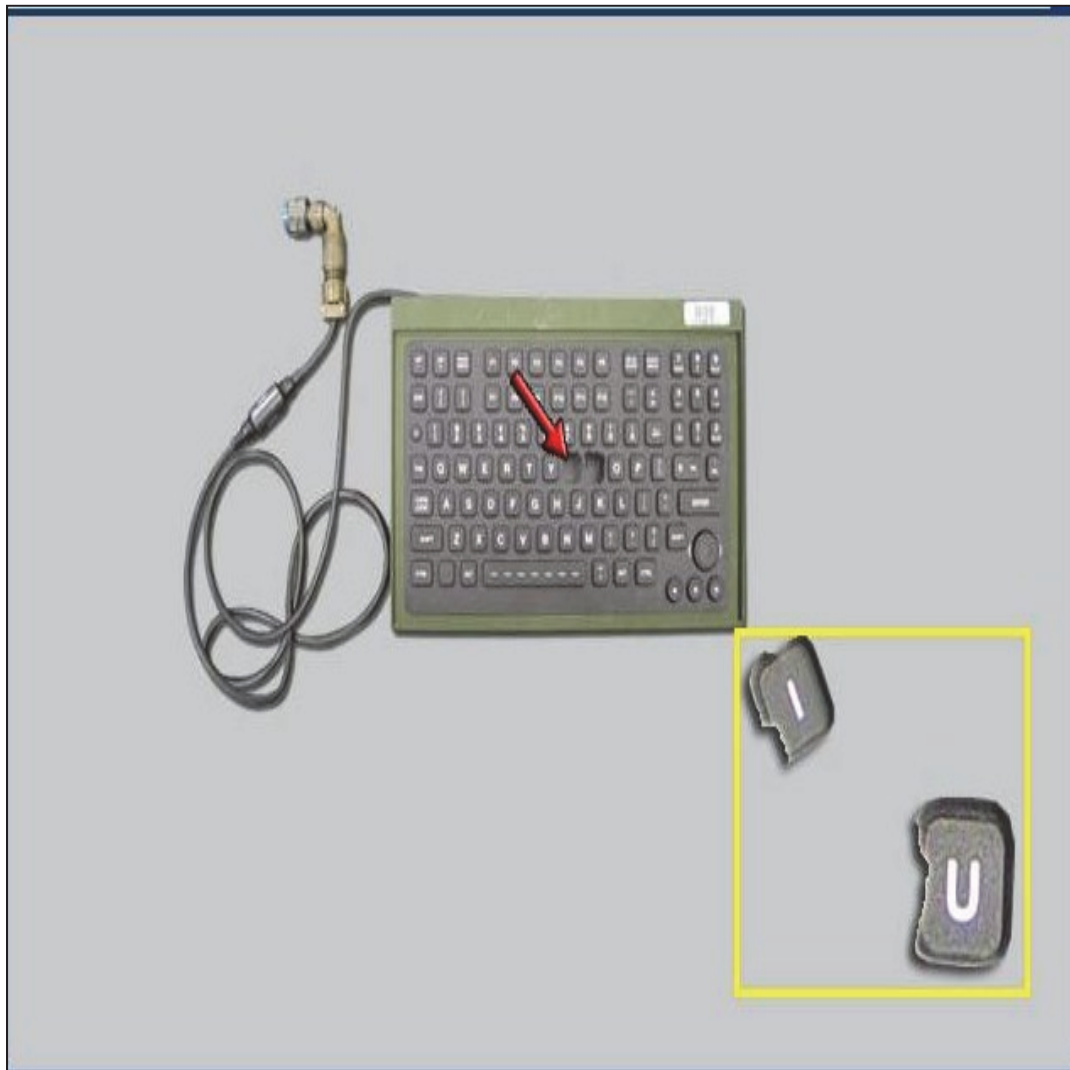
Inspect keyboard for inoperable, missing or sticking keys.
